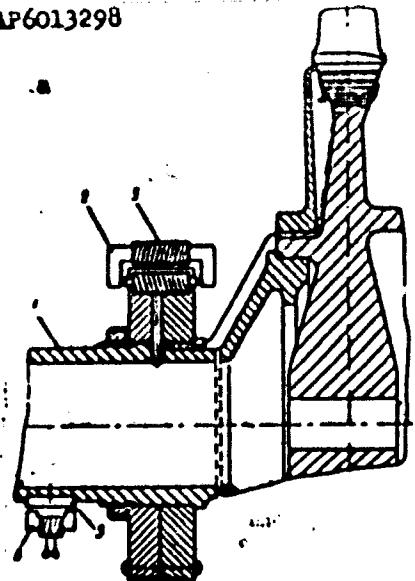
1 - machine shaft; 2 - magnetic connection; 3 - fixed electromagnets; 4 - magnetic screen; 5 - spline-like protrusion; 6 - auxiliary magnet
